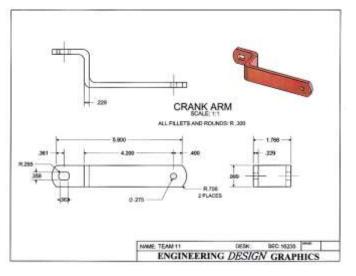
ENGINEERING DRAWING OF A PART FOR A STUDENT PROJECT
